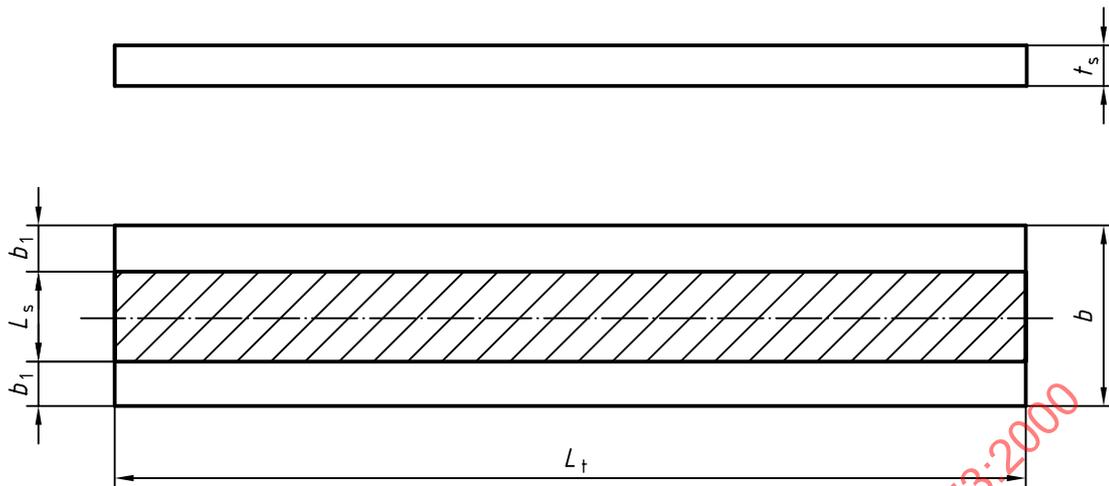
Transverse side bend test specimen for a butt weld (SBB)
